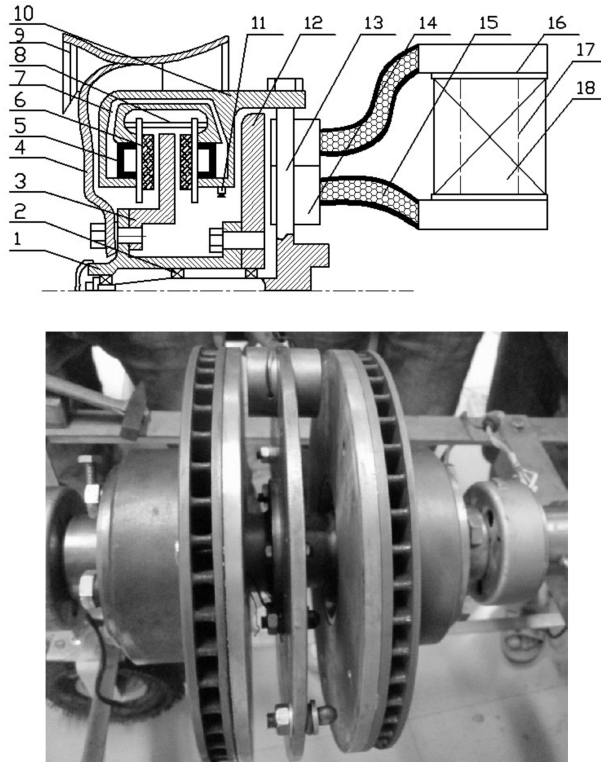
Structure of electromagnetic-hydraulic composite brake: 1–hub, 2–wheel hub bearings, 3–friction brake disc, 4–wheel rim, 5–piston, 6–brake block assembly, 7–wheel cylinders, 8–guide support pin, 9–wheel plate, 10–clamp bracket, 11–inlet of wheel cylinder, 12–electromagnetic brake disc, 13–steering knuckle, 14–electromagnetic guide block, 15–electromagnetic catheter, 16–magnetic pole, 17–field coil, 18–iron core, 19–guide vane
